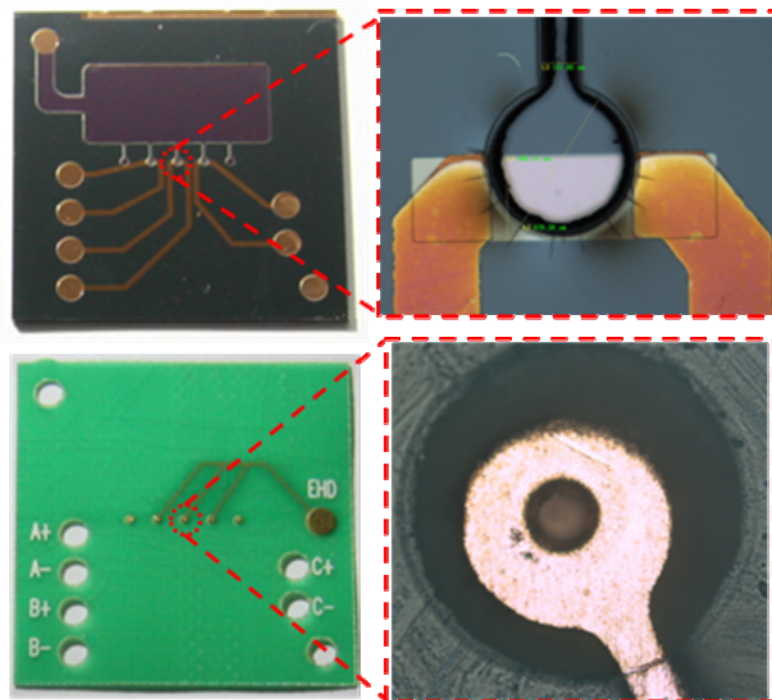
Fabricated thermal jet head and PCB nozzle.
